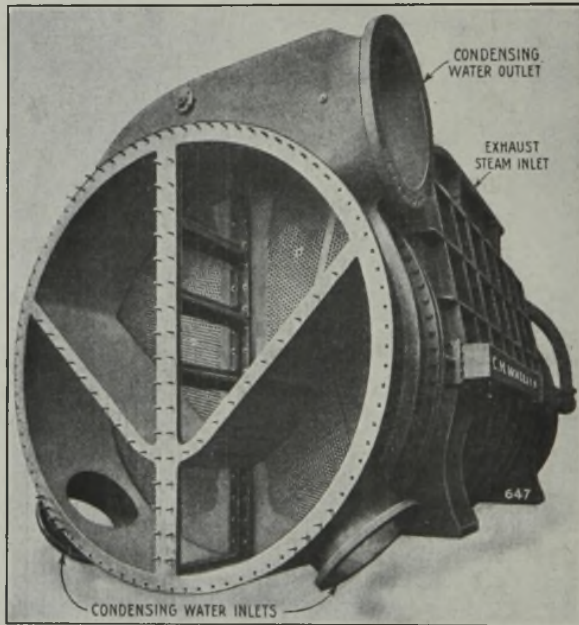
C. H. Wheeler Manufacturing Company two-pass condenser.
